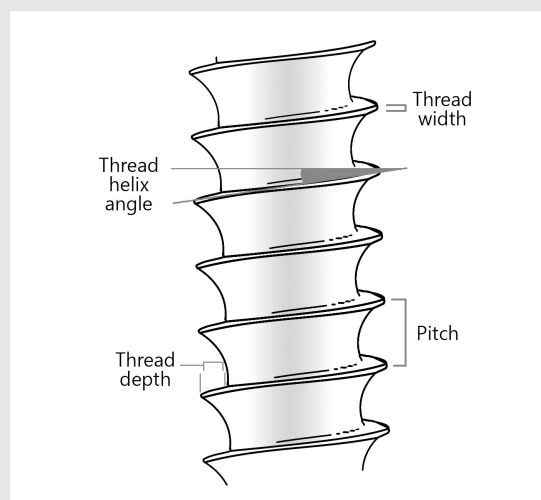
Schematic drawing of the implant macro-thread design: thread helix angle, thread pitch, thread depth and thread width.
